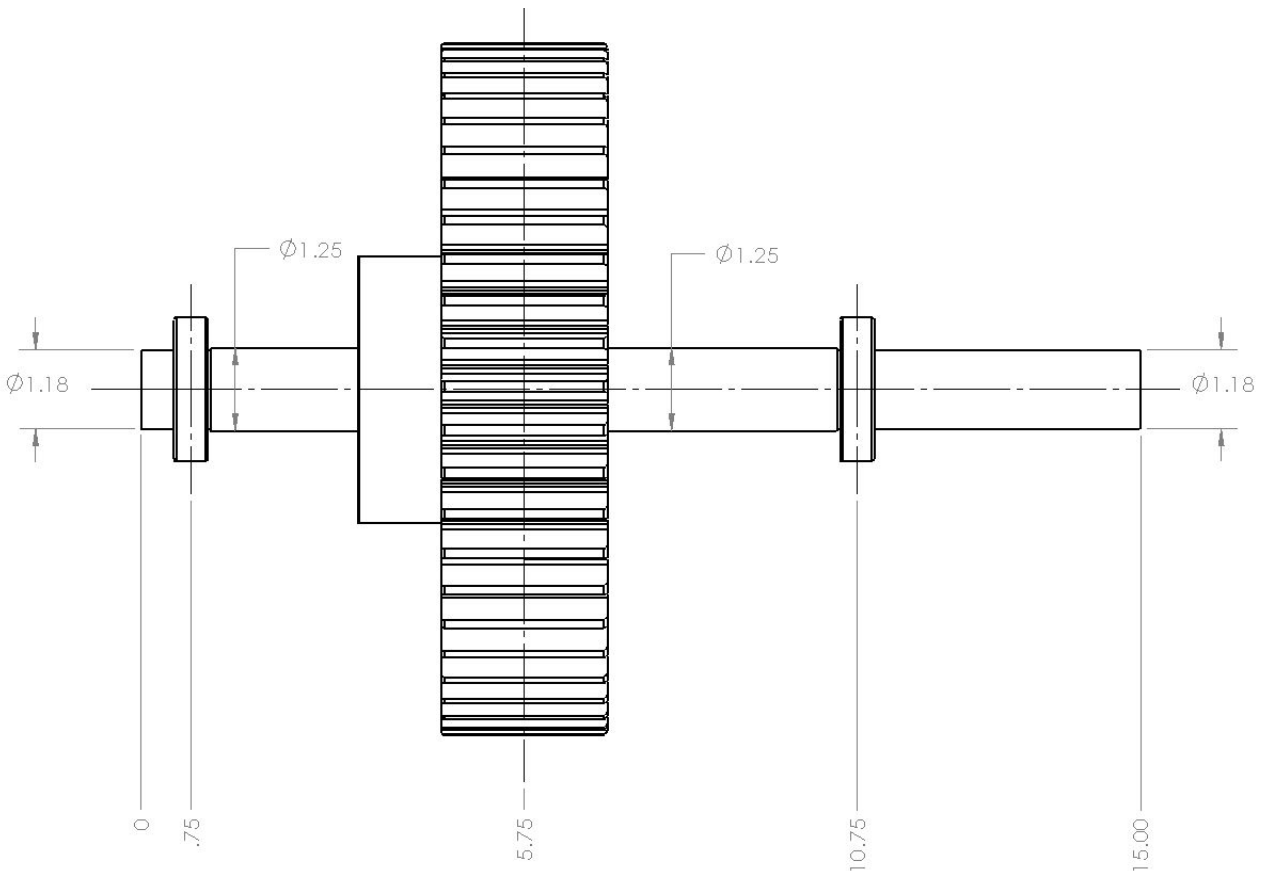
Location of Mounting Features on the Input Shaft and Input Shaft Dimensions (Inches)
